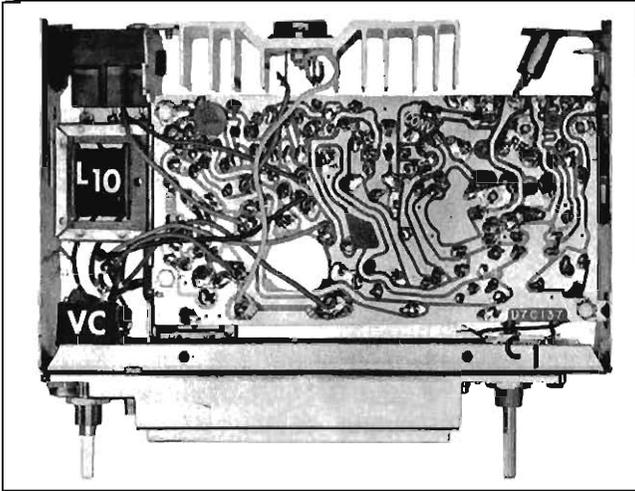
CHEVROLET PARTS LAYOUT CIRCUIT BOARD VIEW - 985875 - RADIO
